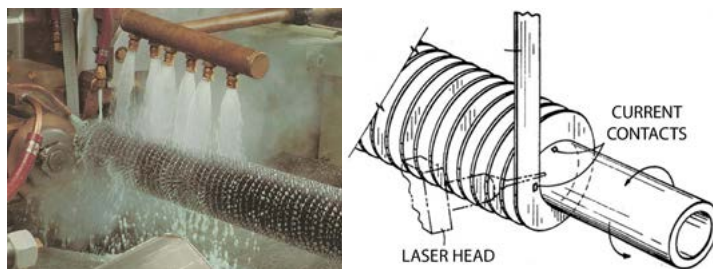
Pipe manufacture using high-frequency current welding: a) pipe-rib high-frequency current welding process [8] b) diffusion welding by means of high-frequency current and laser [9]
